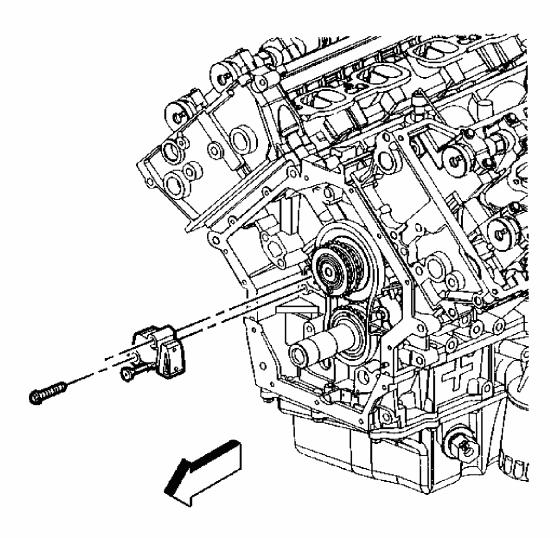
Locating Primary Camshaft Drive Chain Tensioner & Bolts Courtesy of GENERAL MOTORS CORP.
